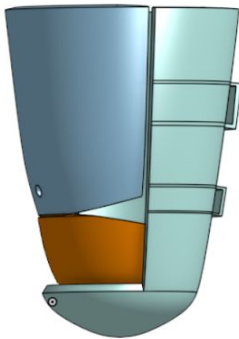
CAD mockup of the new design shows the three pieces that slide together for diameter adjustment
